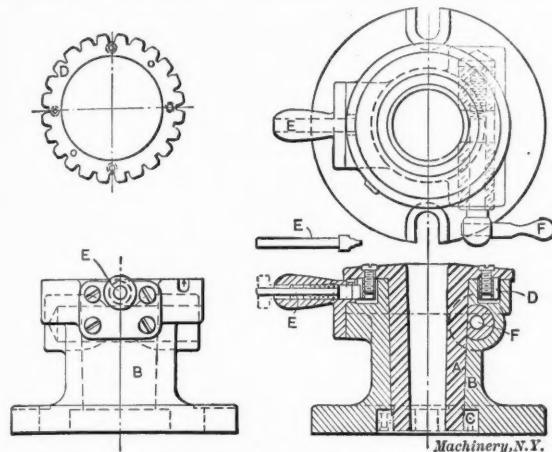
Elevation, Section and Plan, showing Construction of the Vertical Indexing Head.
